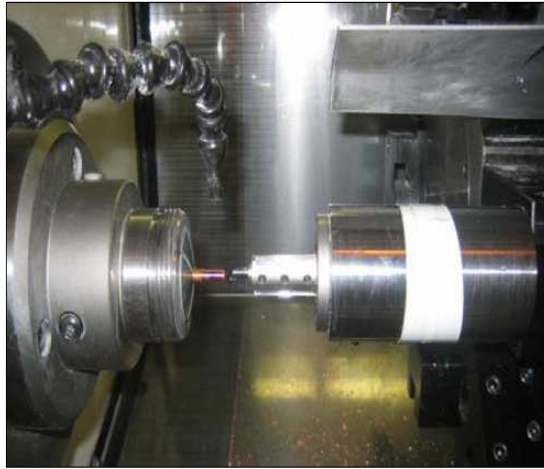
Specially developed oscillating tool attached to the piezoelectric oscillator located within the machining center
